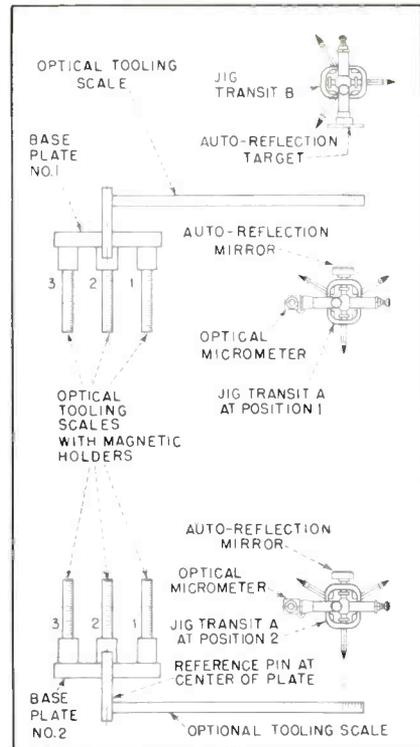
Steps in aligning base plates between which a 20-foot antenna tower section is assembled and welded
